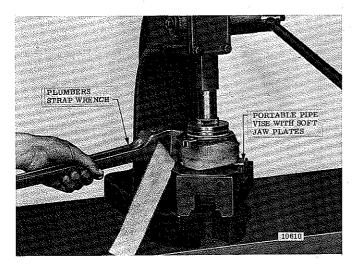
Winding Load Brake Gear Using a Strap Wrench to Set Up Load Brake Spring.
